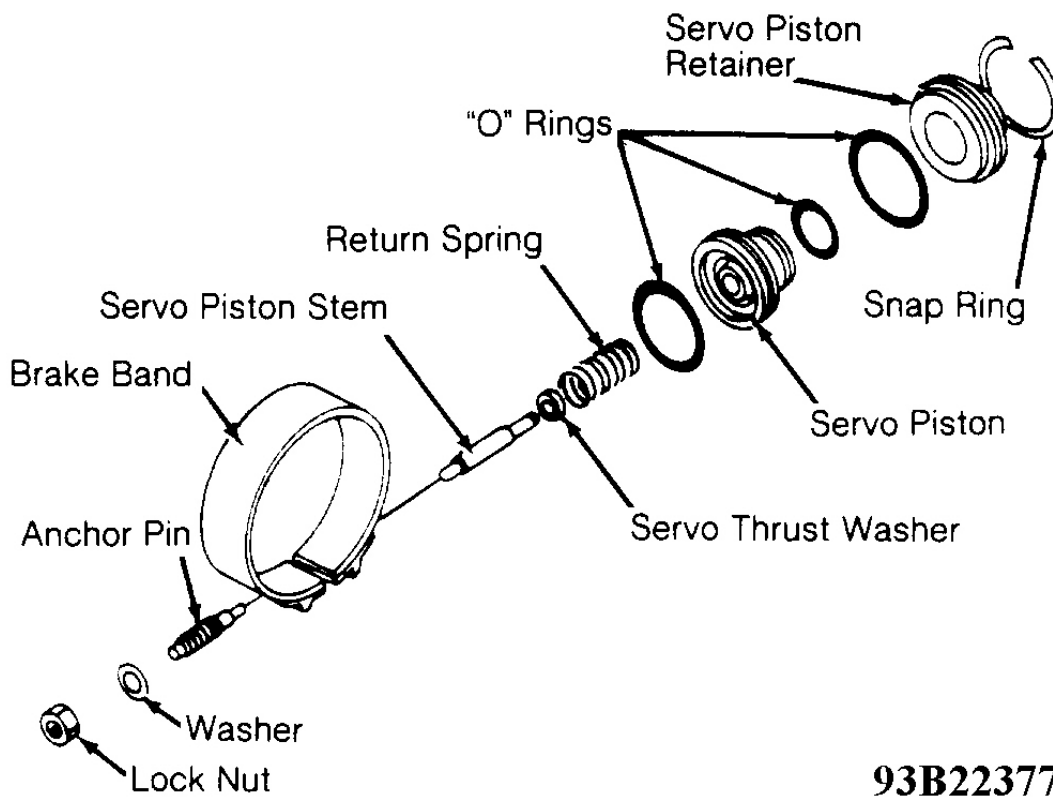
Exploded View Of Brake Band & Band Servo Assembly
